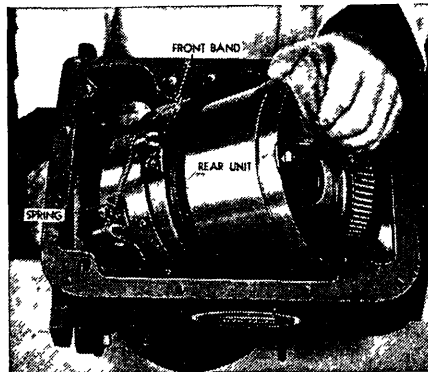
Remove rear band. Install suitable spring or wire to hold front band on drum. Then raise units from case
